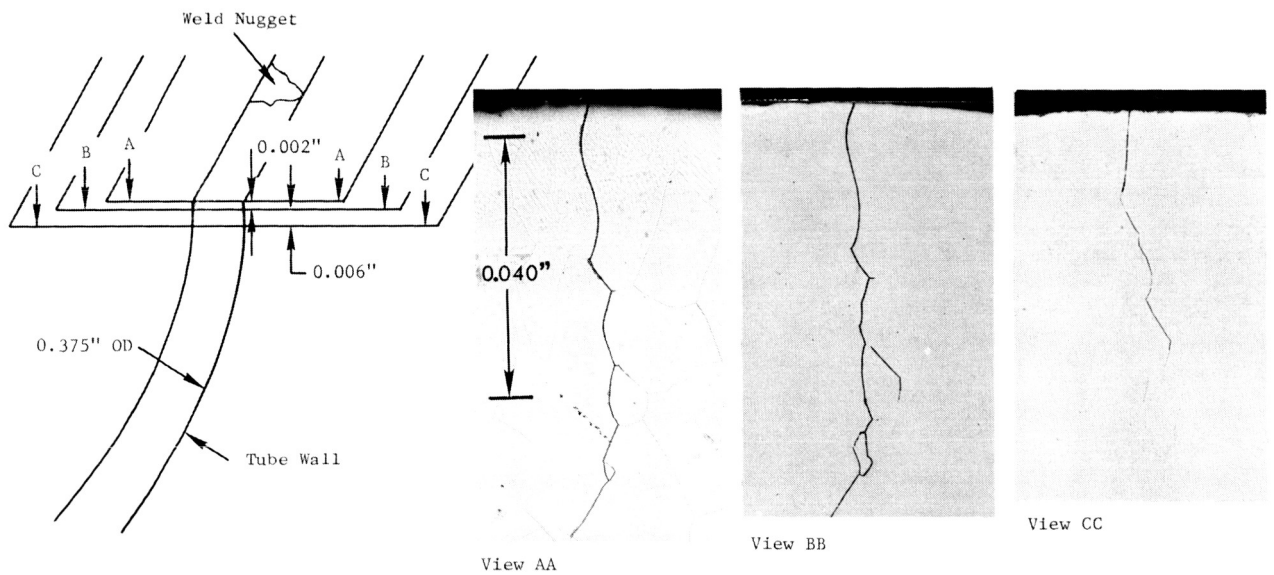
Intergranular crack in weld nugget of 0.375-inch-diameter T-111 boiler tube removed from T-111 Rankine system corrosion test loop.
